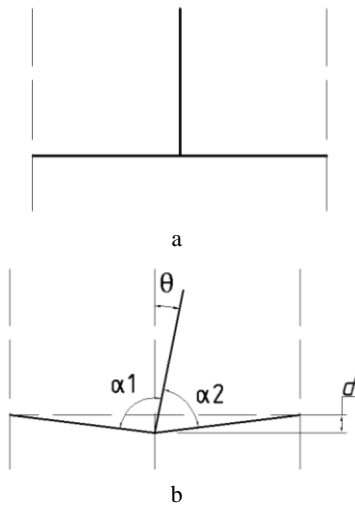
a – before welding; b – after welding: α and the deviation d will be measured which then will be used to calculate θ
